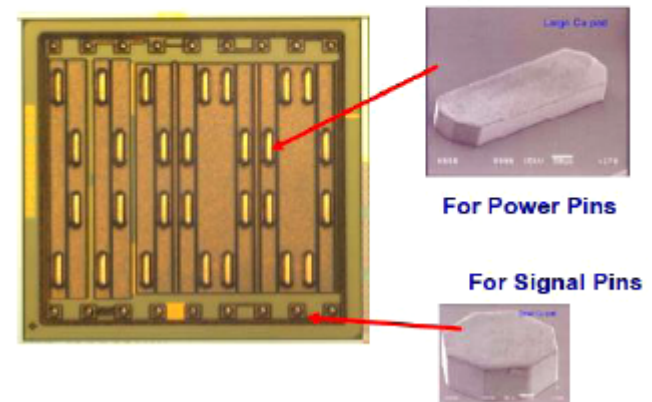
(left) top view of die, (right) SEM views of plated bump connections.
